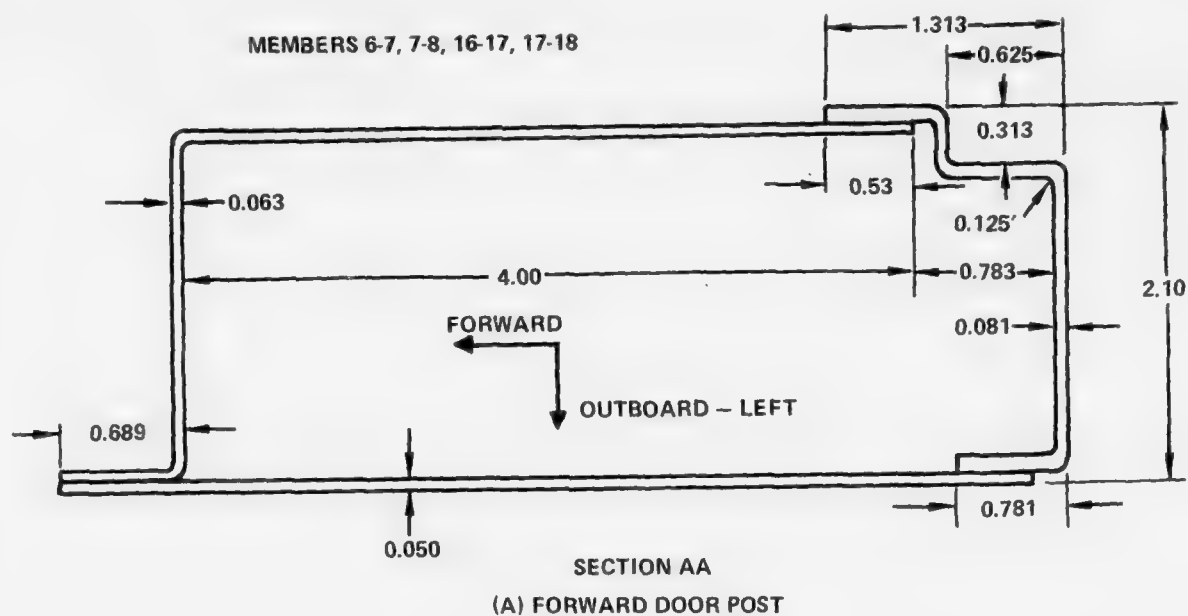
Forward Door Post, Forward Floor Bulkhead, and Carry Thru Structure Cross Sections
